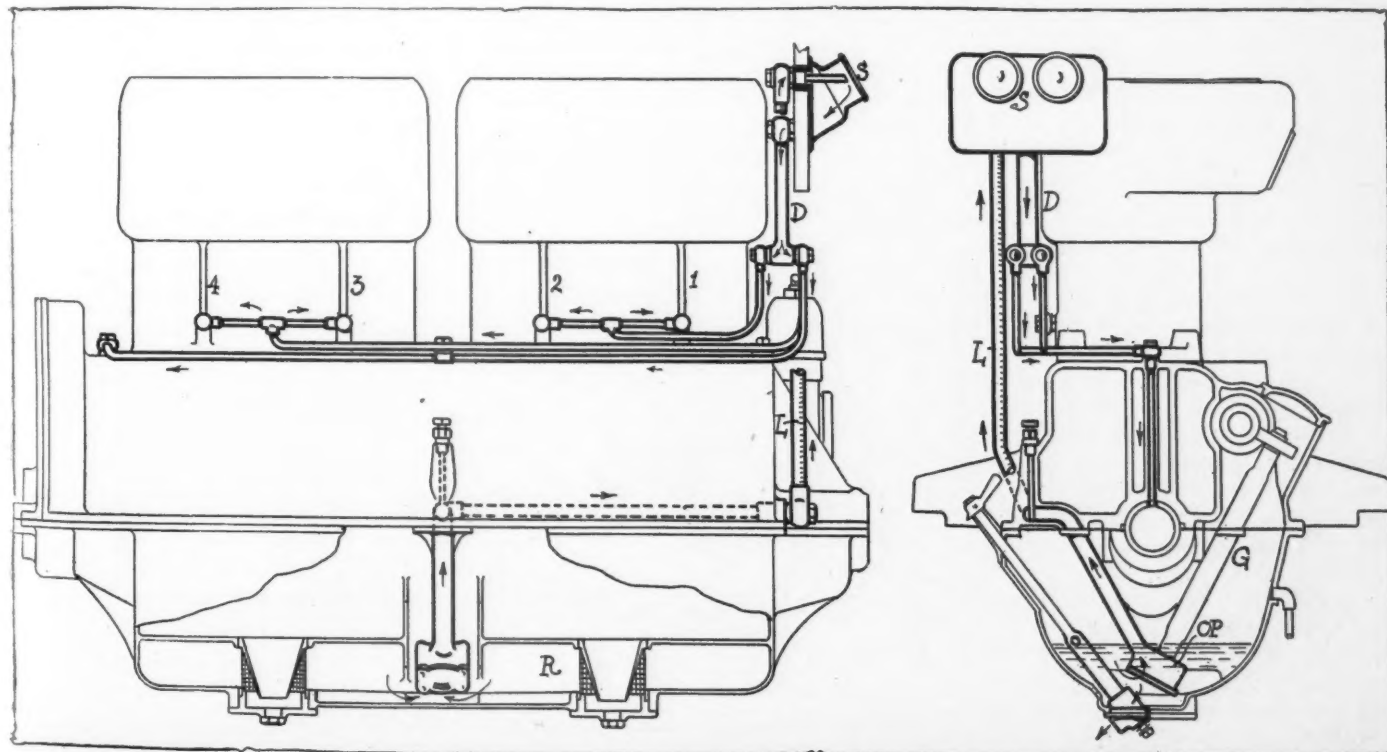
TWO VIEWS OF CIRCULATING OIL SCHEME USED ON AMERICAN MOTORS
